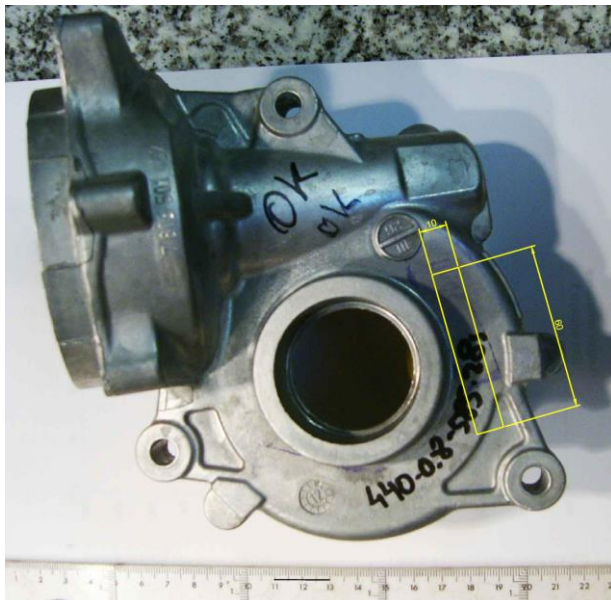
(a) example of a part, (b) the dimensions of the probet for the tensile tests.
